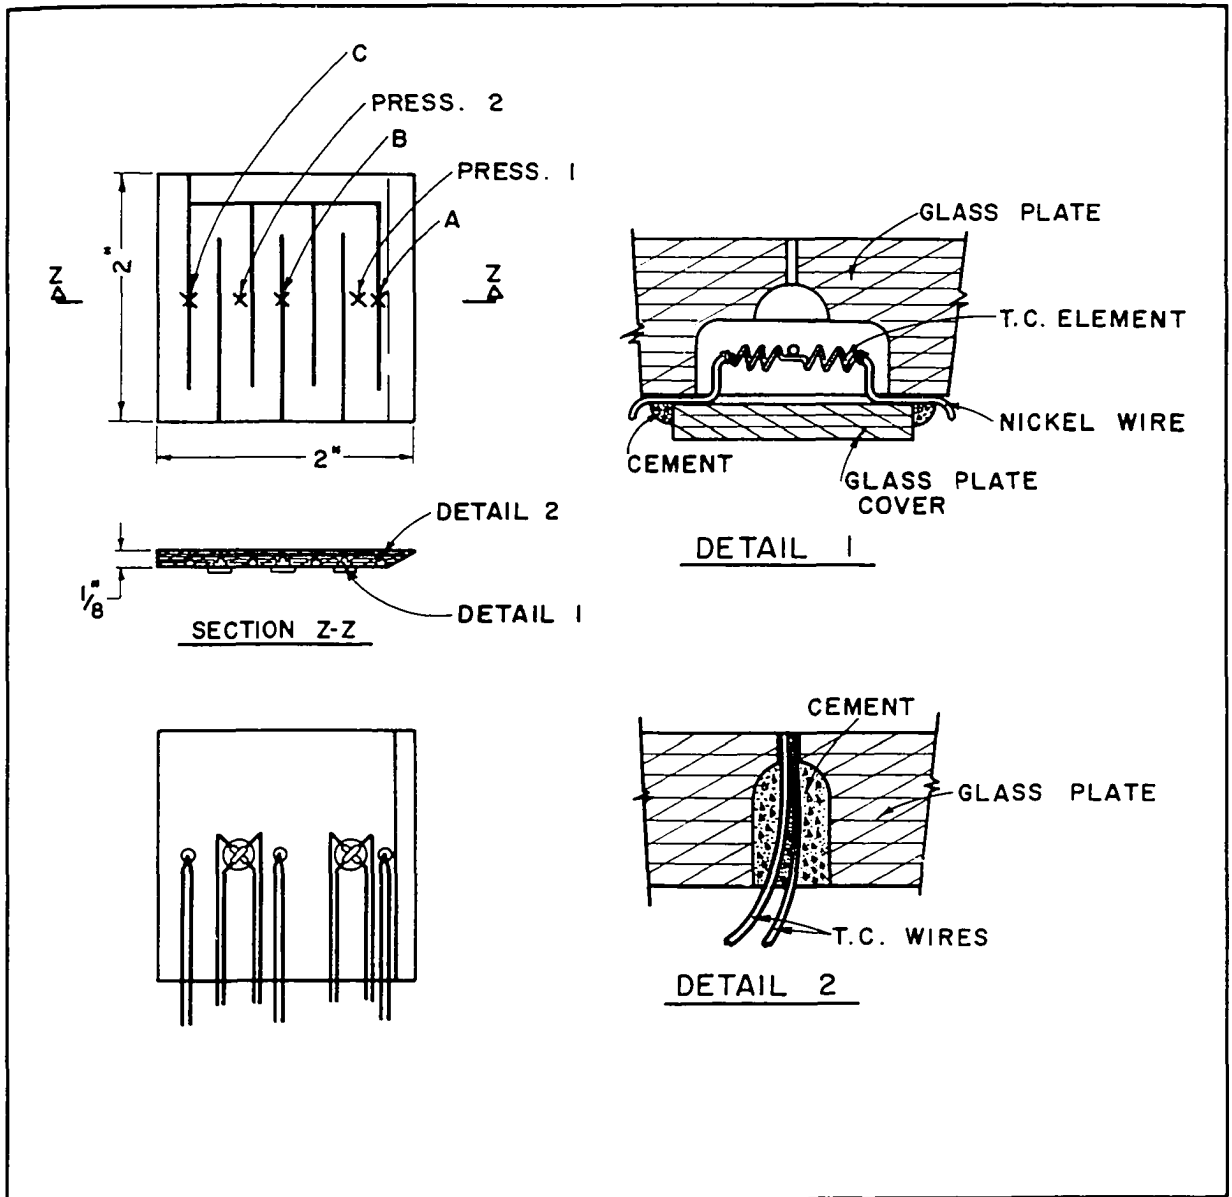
DETAIL DRAWING OF THE FULLY INSTRUMENTED FLAT PLATE MODEL
